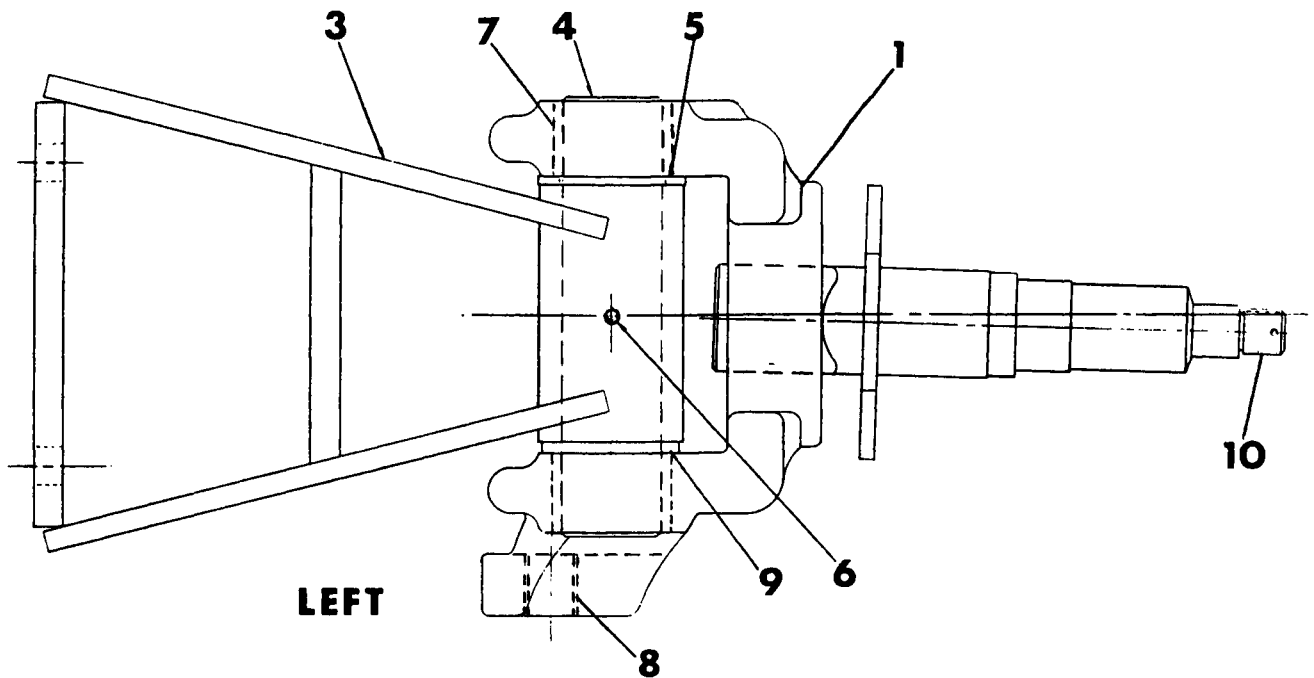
FRONT AXLE ASSEMBLY (PRIOR)
